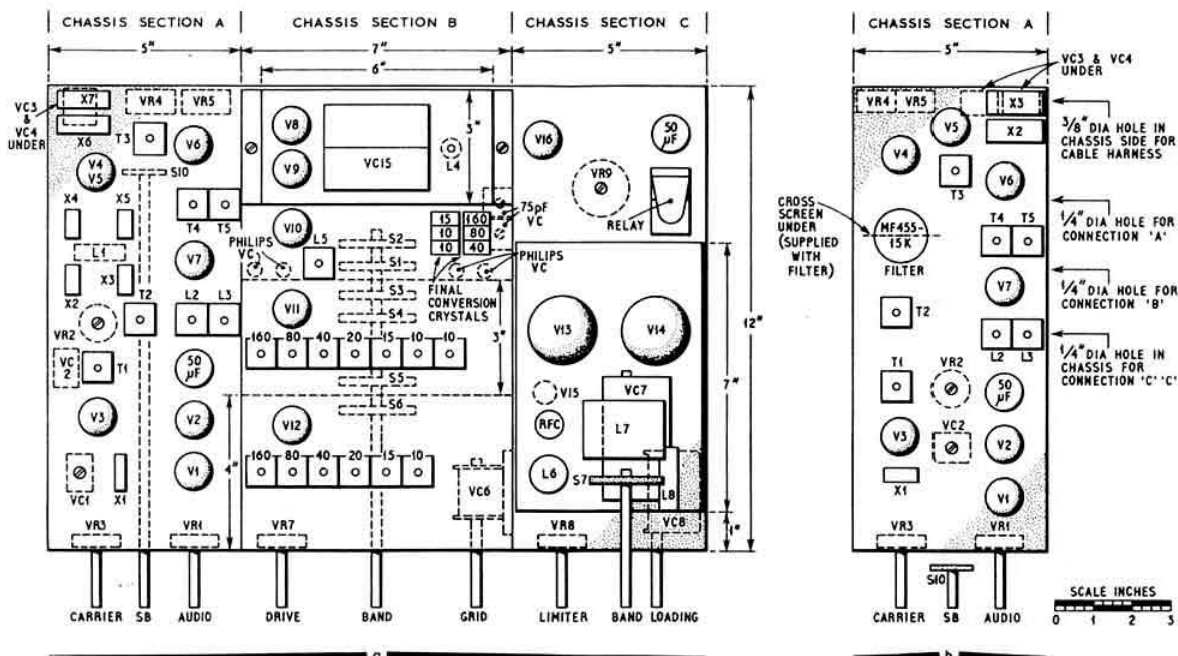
(a). Chassis layout showing the principal components. (b). Chassis layout for the I.f. filter sideband generating unit (chassis section A). The sideband selection switch S10 is mounted directly on the panel, which is positioned ½ in. away from the chassis front apron.
